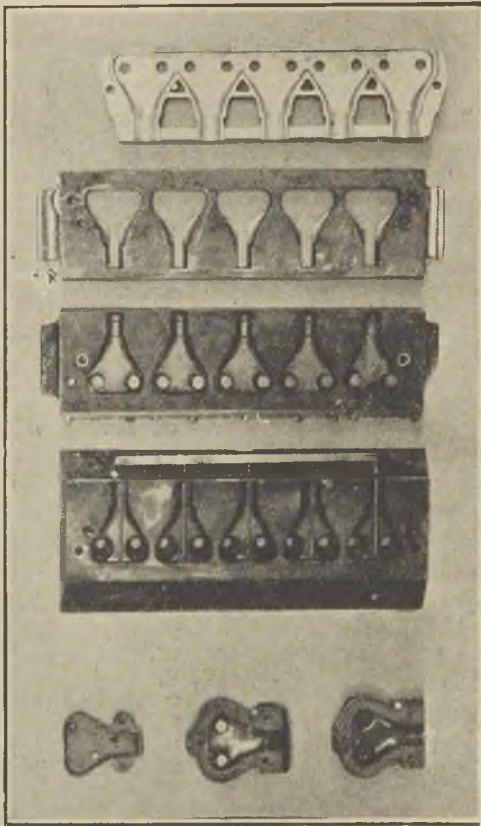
A SINGLE CORE BOX FOR BENCH WORK (LOWER), AND A MULTIPLE BOX FOR A ROLL-OVER MACHINE FOR THE PRODUCTION OF THE SAME CORE.
